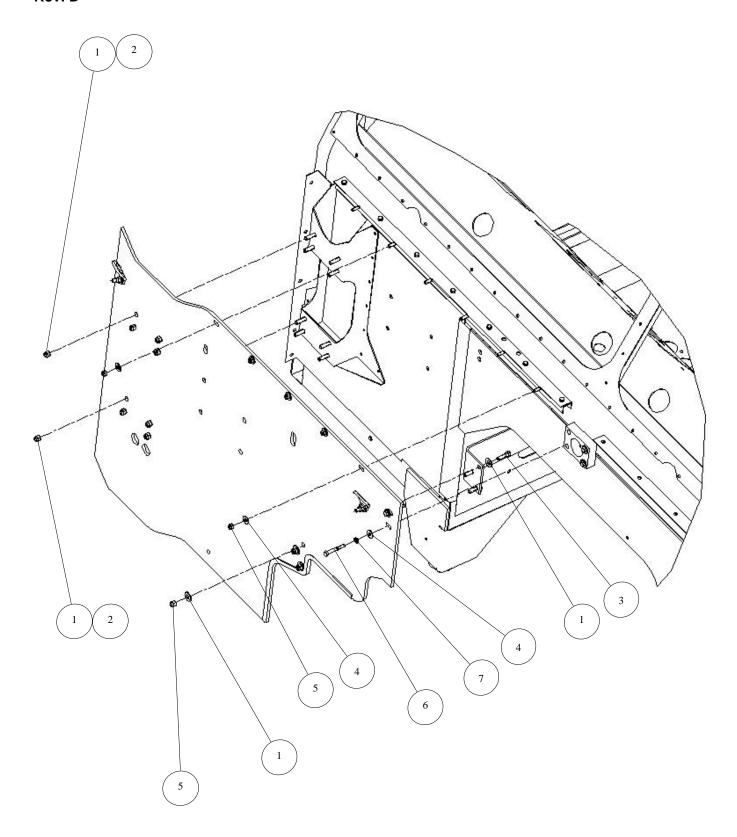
Firewall Right Panel Assembly Installation (Sheet 2 of 2).
